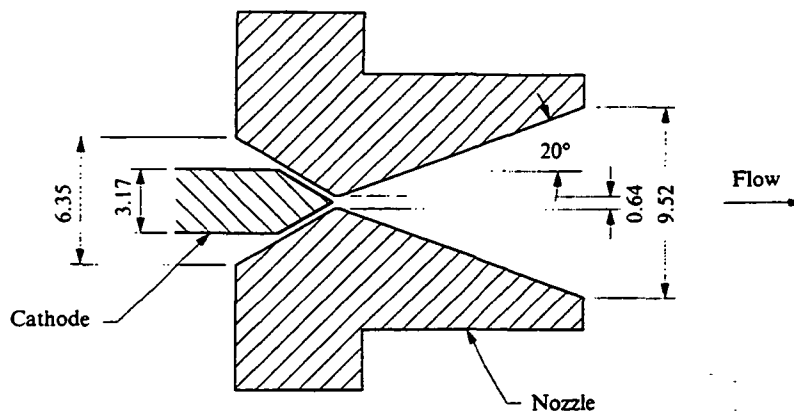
Nozzle geometric configuration (dimensions in mm).
